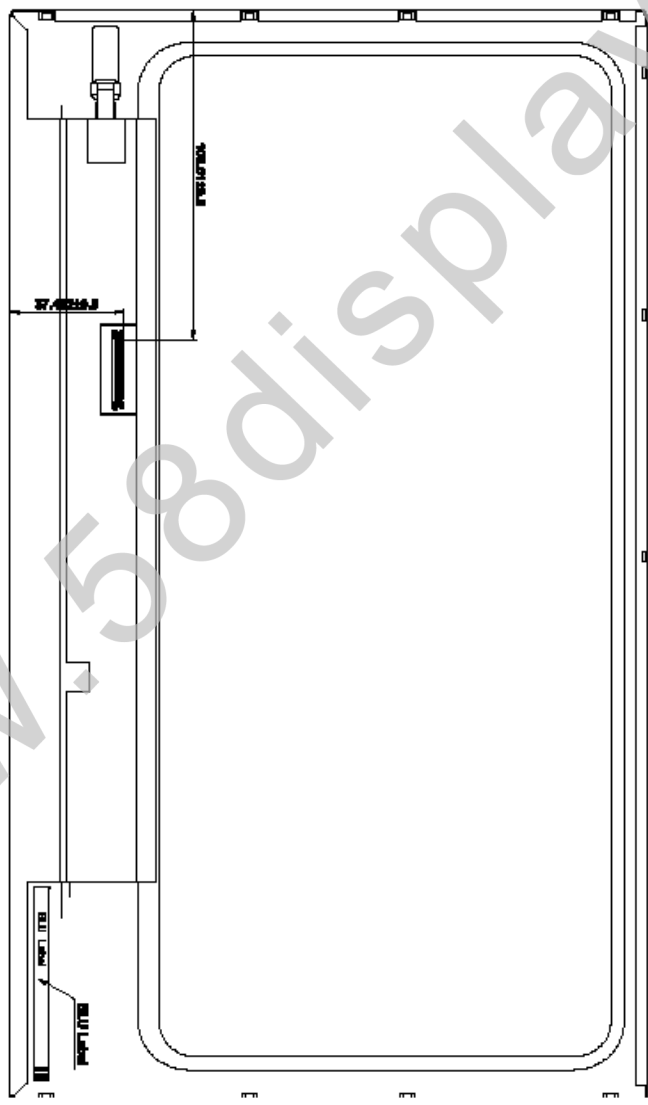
TFT-LCD Module Outline Dimension (Front View)
